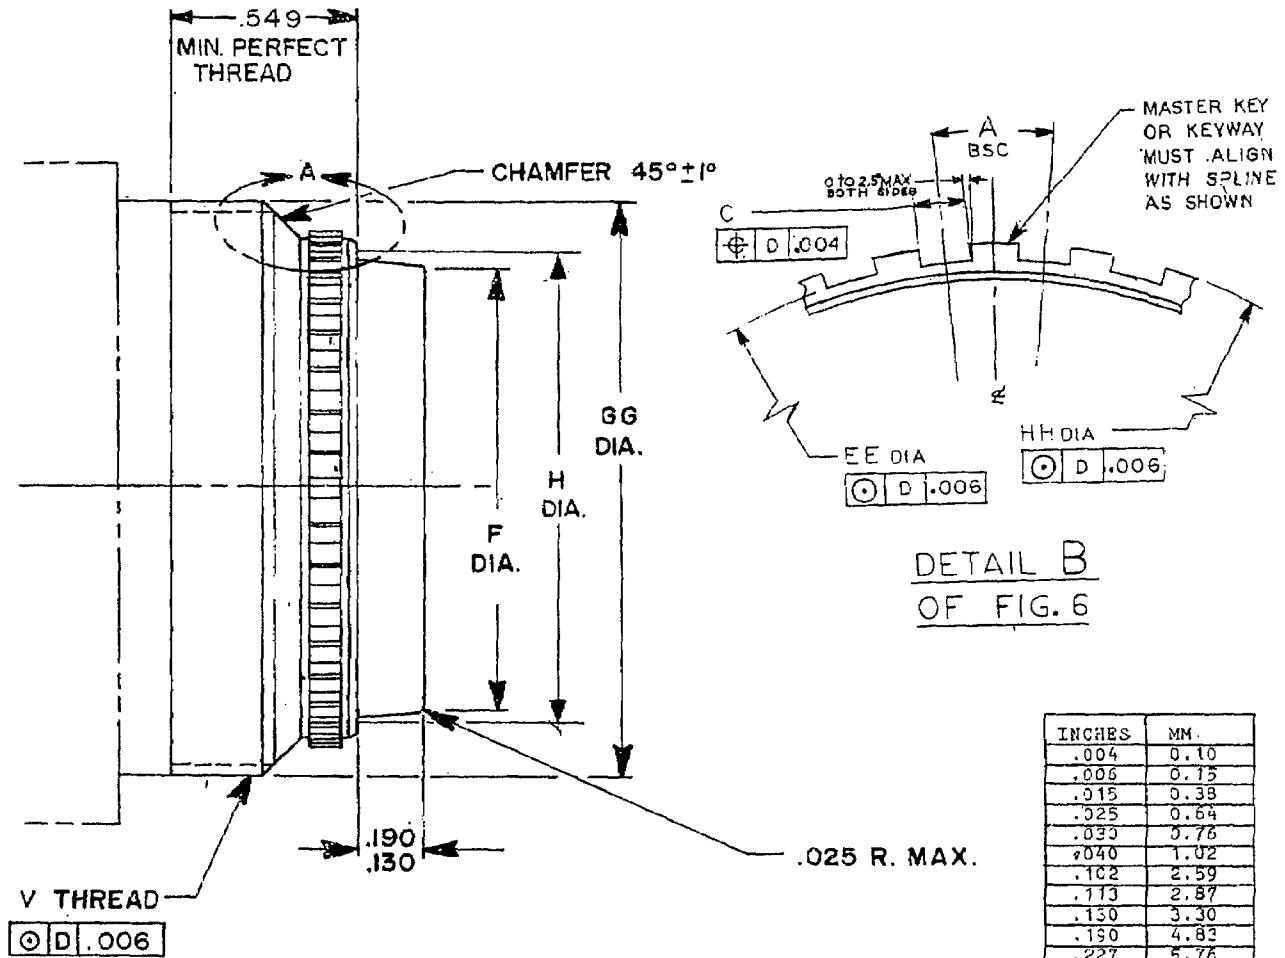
Connector, receptacle, electrical, interface dimensions.
